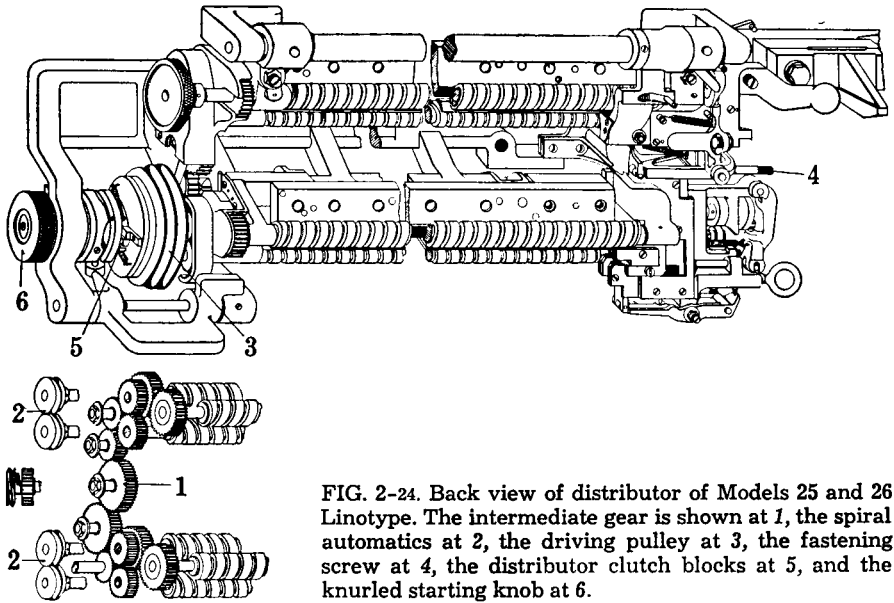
Back view of distributor of Models 25 and 26 Linotype. The intermediate gear is shown at 1, the spiral automatics at 2, the driving pulley at 3, the fastening screw at 4, the distributor clutch blocks at 5, and the knurled starting knob at 6.
